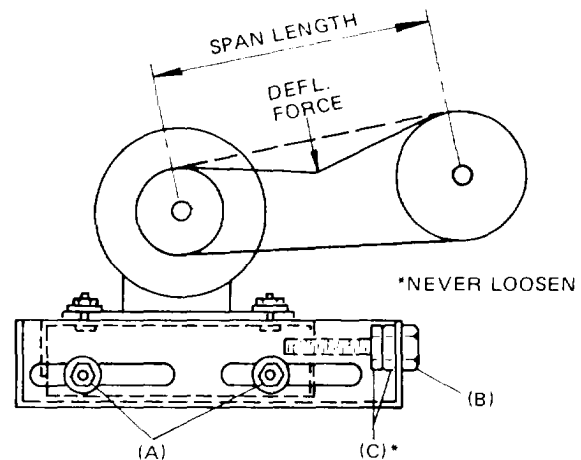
TYPICAL MOTOR MOUNTING ASSEMBLY
